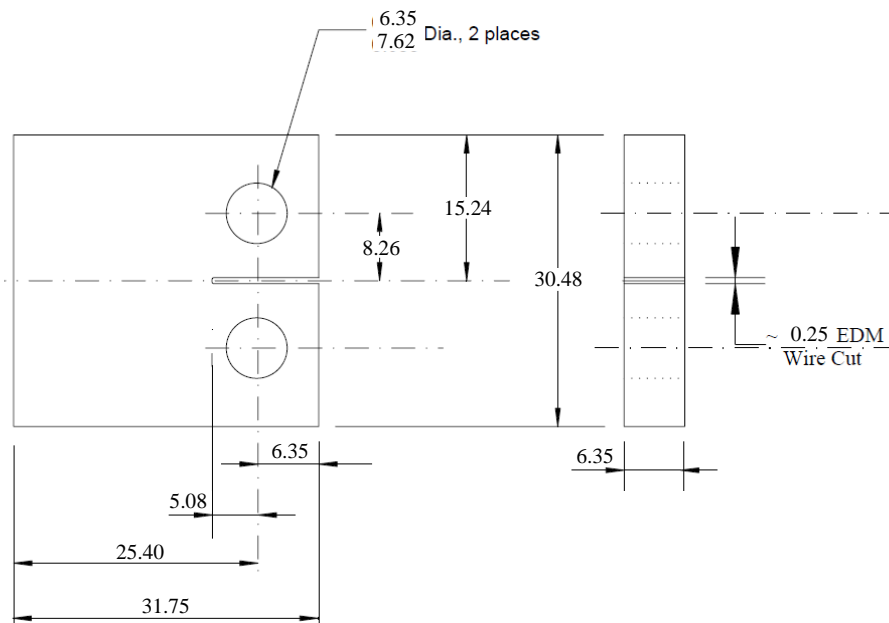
Creep-fatigue specimen geometry (dimensions are in mm)
